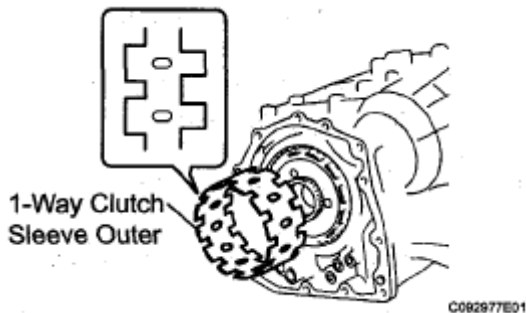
Identifying 1-Way Clutch Sleeve Outer
